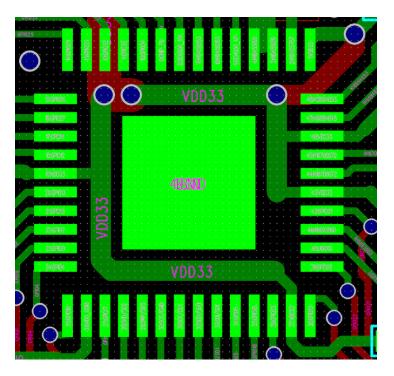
ESP32 Power Traces in a Two-Layer PCB Design
